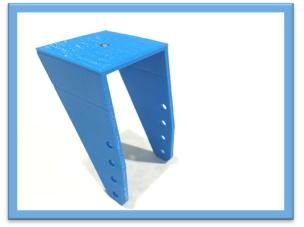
Swivel Wheel Bracket Module Assembled On Autodesk [prototype two]
